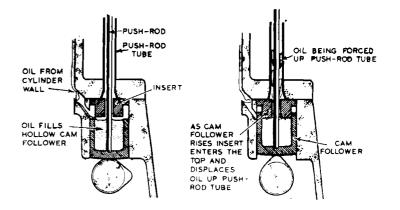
SHOWING HOW VALVE ROCKERS ARE LUBRICATED BY PUMPING ACTION OF NO.'S 1 & 3 CAM FOLLOWERS.
